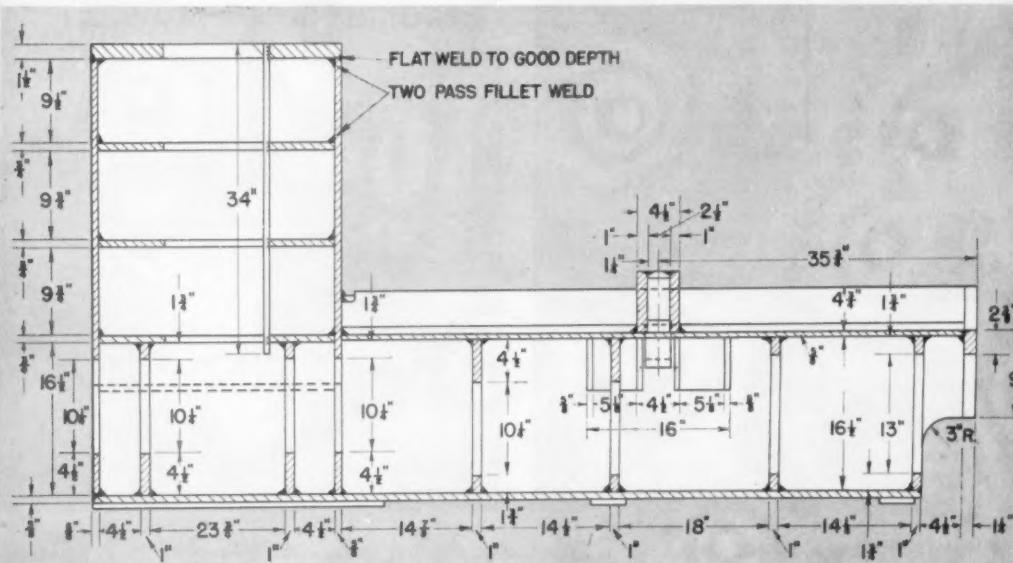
Longitudinal cross-section through the center of the 6500-lb. welded steel base. Heavy plate ribs, with continuously welded
